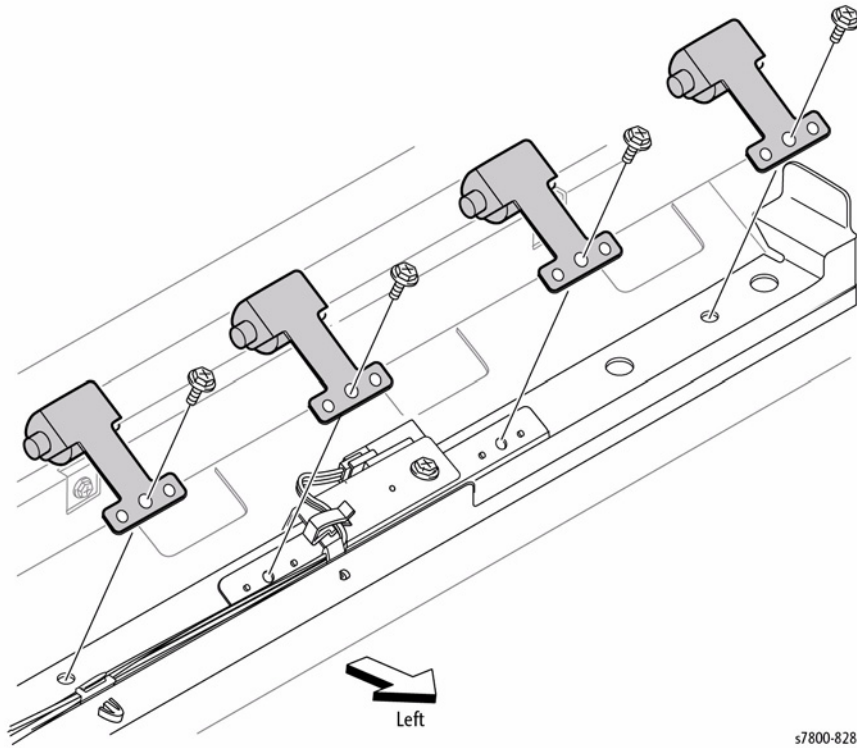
Removing the Upper Entrance Chute Pinch Rollers
